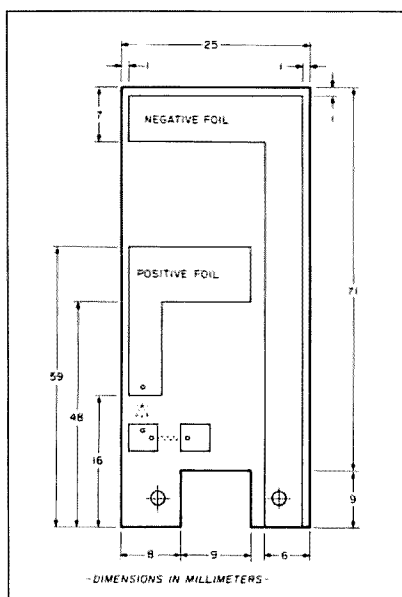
PC board dimensions. The two small foil pads provide mounting points for CR1 and R1. Their dimensions are not critical.
